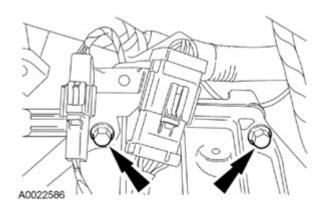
Removing Heater Outlet Tube Courtesy of FORD MOTOR CO.
